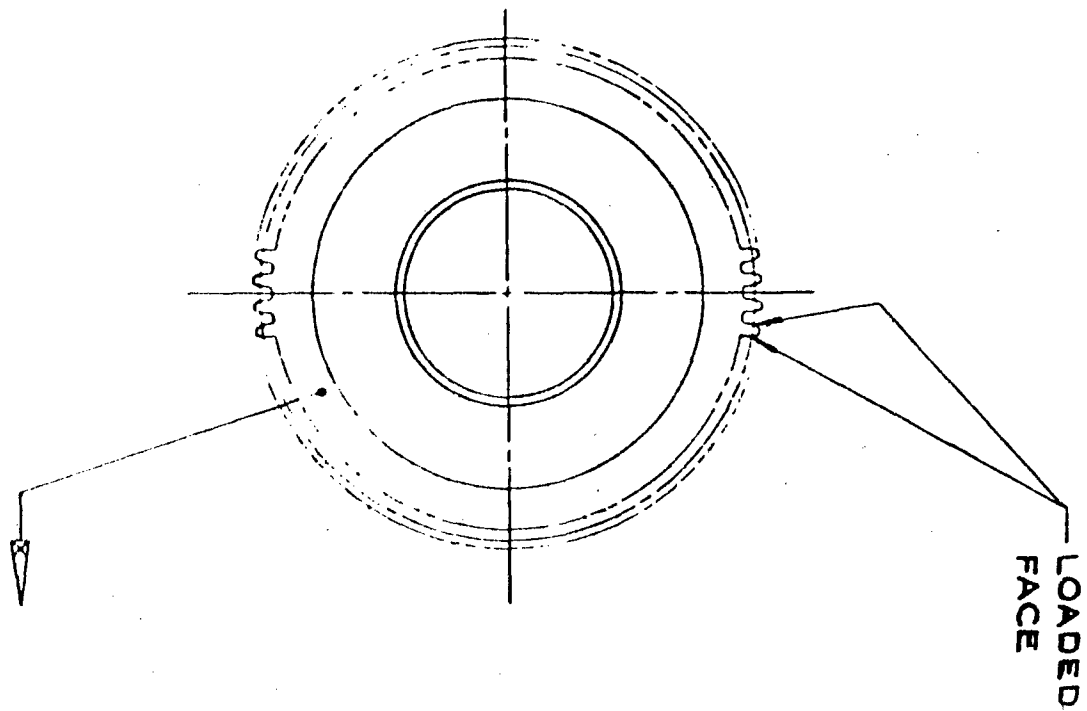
AGT 1500 No. 6 Accessory Gear.
